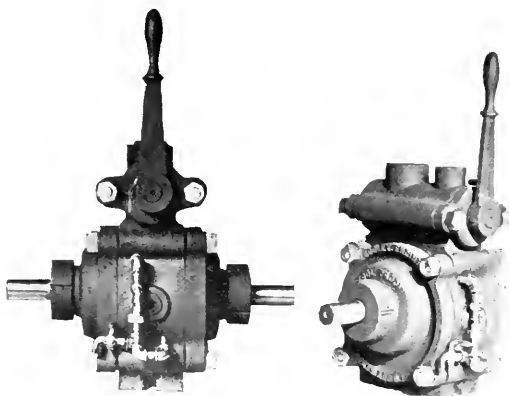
TWO VIEWS OF COOLEY ENGINE.
